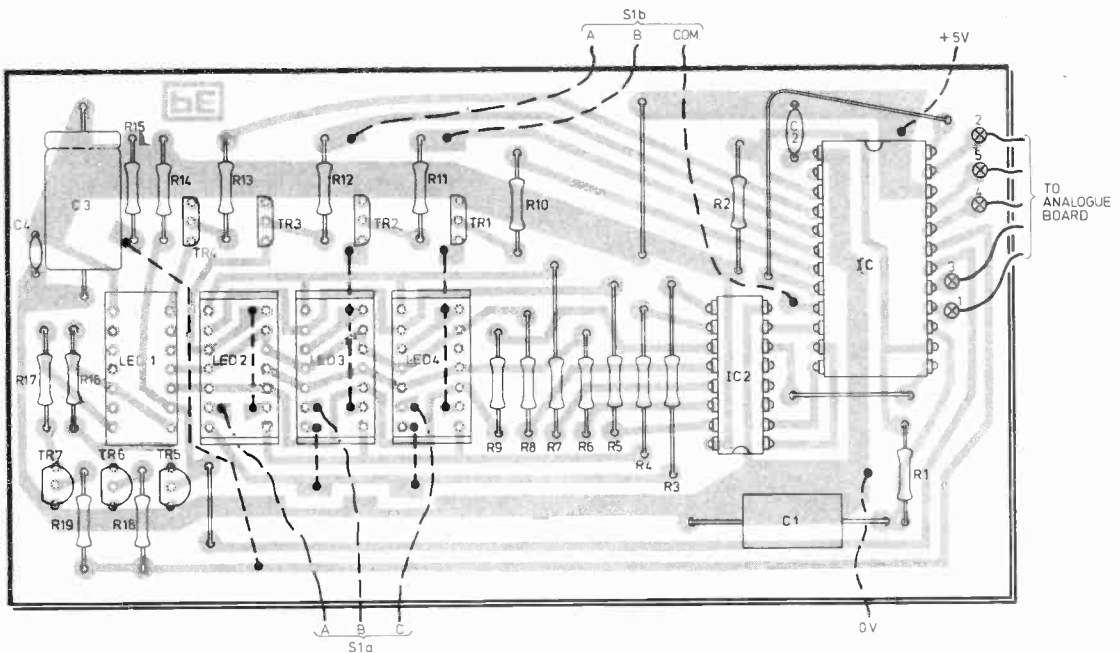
Component layout and external connections. Links and connections shown in broken line are made on the copper side of the board
